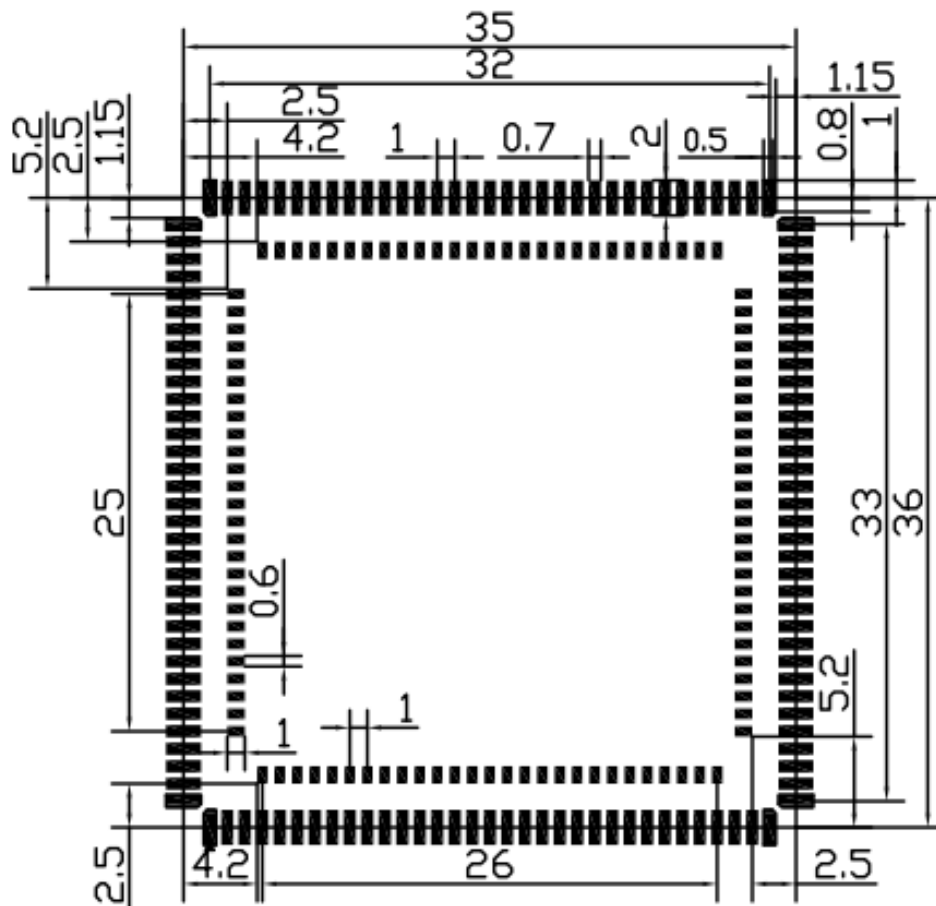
Recommended application foot print for S2 (Unit: mm)
